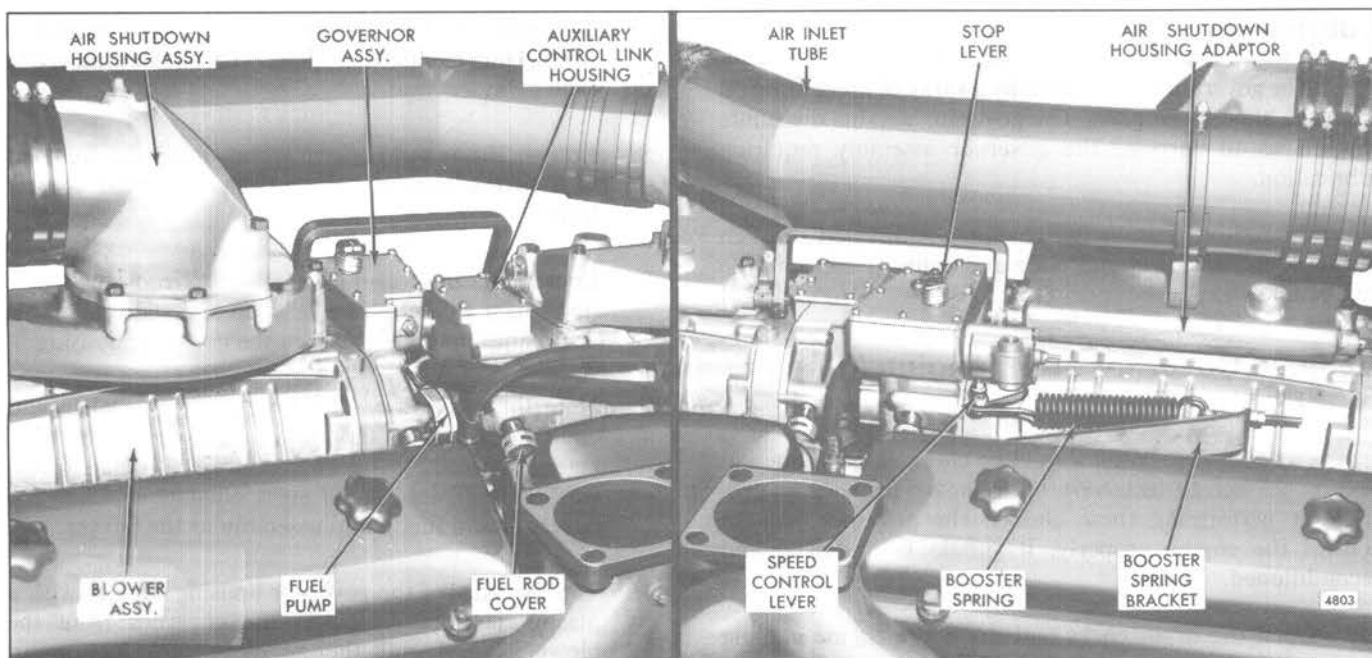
Variable Speed Governor Mounting (12V and 16V Engines)
